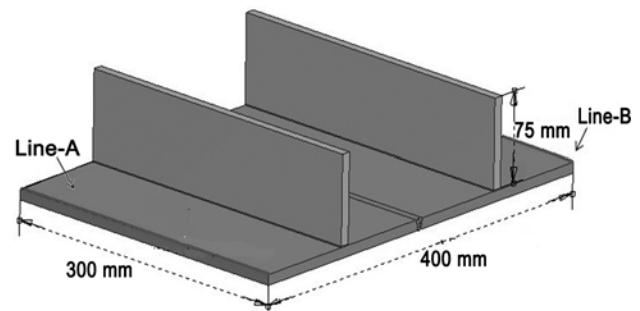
Geometry and displacement measurement line A and B in the combined butt and fillet joint weld model
